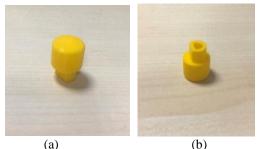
Keypad 3D printer output (a) top view (a) bottom view.
